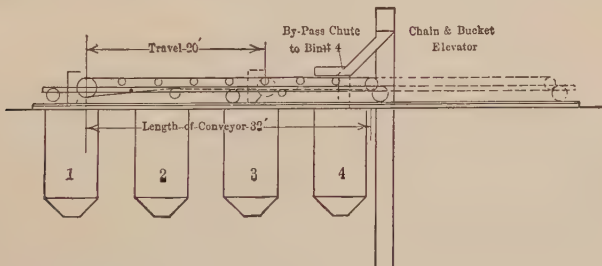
Simple Form of Shuttle Belt Conveyor Serving Three Pins.
